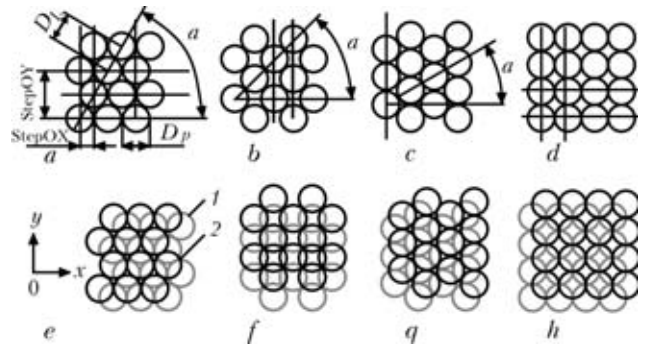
Manufacturing of first layer (*a-d*) and second layer (*e-h*) of single crates (holes) at different angles, where: 1 – 1st layer; 2 – 2nd layer; *a* – processing angle 60°; *b* – processing angle 45°; *c* – processing angle 30°; *d* – processing angle 90°
